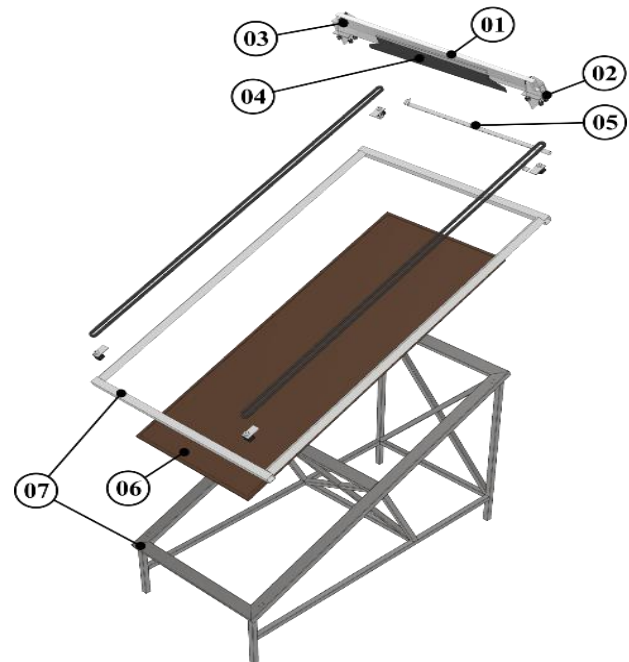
Exploded view of the proposed cleaning device showing the main mechanical components and assembly sequence
